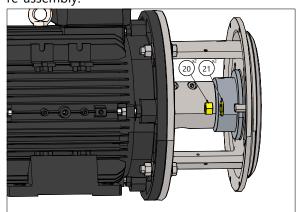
Remove the nuts [20] and washers [201] fastening the back casing [12] to the lantern [11].
